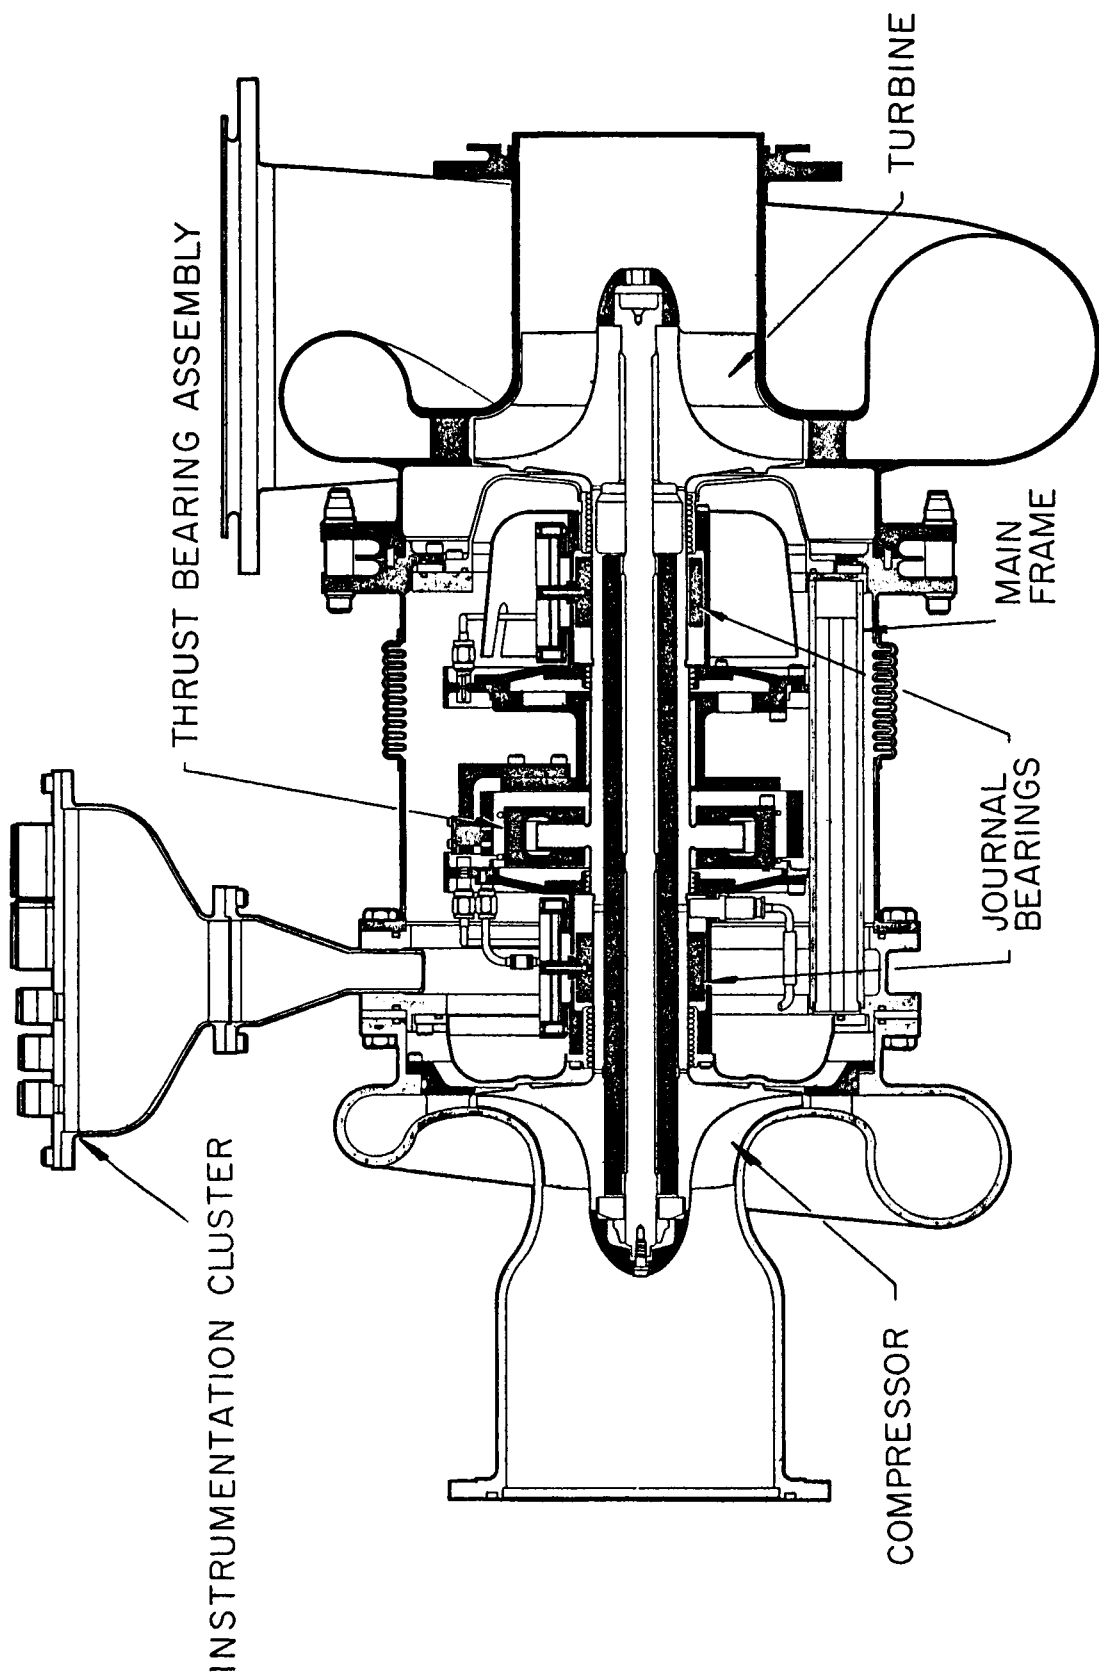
shows a schematic of the final gas generator configuration. The compressor and turbine wheels are mounted on a common shaft into which is incorporated a double-acting thrust bearing slider. Pivoted-pad gas-journal bearings support the shaft, one on each side of the thrust bearing next to the turbine and compressor wheels. These bearings are of the hydrodynamic type (self acting) with hydrostatic lift-off capability for starting and stopping. Between the journal bearing carriers are located the hydrostatic and hydrodynamic thrust bearing stators. The wheels, shaft, and bearings are mounted in the main frame, on which is also mounted the compressor scroll and diffuser and the turbine nozzle and scroll.
